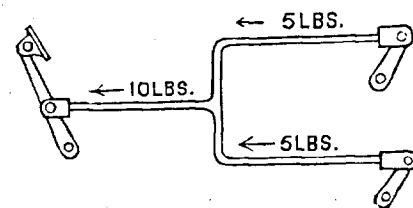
Perfect equalization without any compensating mechanism. This calls for accurate adjustments.
